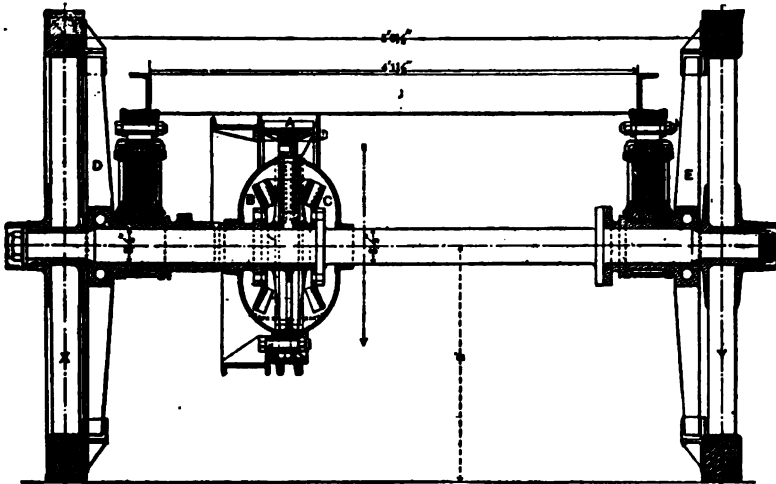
The rear axle of the Thornycroft steam wagon, showing the peculiar arrangement of the differential gears and driving connections. The driving is by the spur gear, A, attached on the gear box in the usual manner. The bevel gear, C, is mounted rigidly on the right side of the solid through-axle shaft. The gear, B, is similarly mounted on a sleeve at the left. The wheels, X and Y, turn loose on the through rotating axle, being driven by the springs, D and E, which bear upon lugs at the rim, as will be subsequently explained. This arrangement permits the removal of either wheel, as in horse carriages. G and F are the wagon springs, one resting above the rotating axle, the other above the rotating sleeve.
